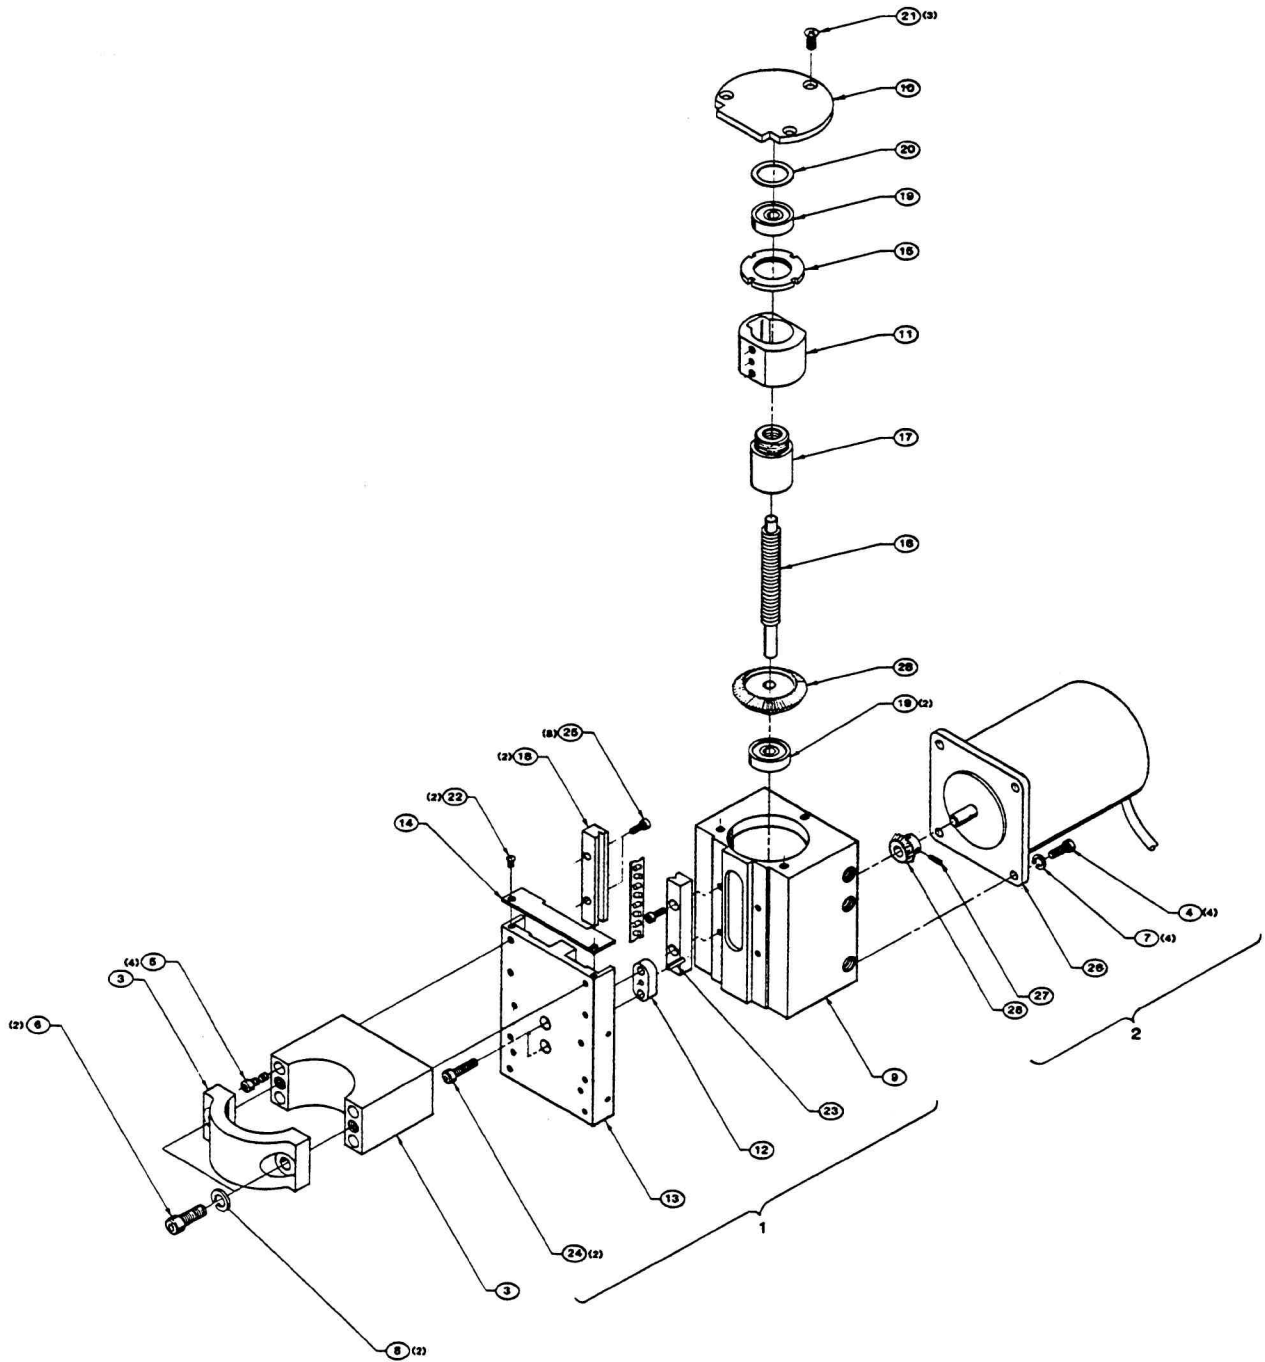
AVC-5 COMPACT DRIVE ASSEMBLY EXPLODED VIEW
